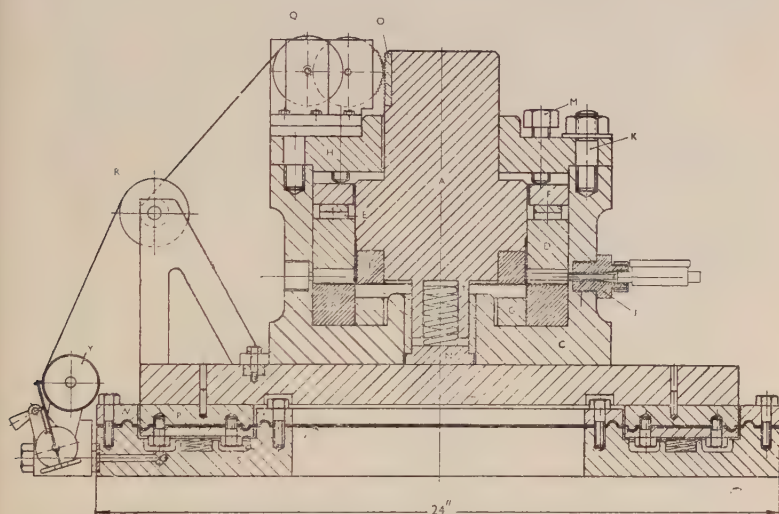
Blank Shearing Tool and Autographic Recorder.
